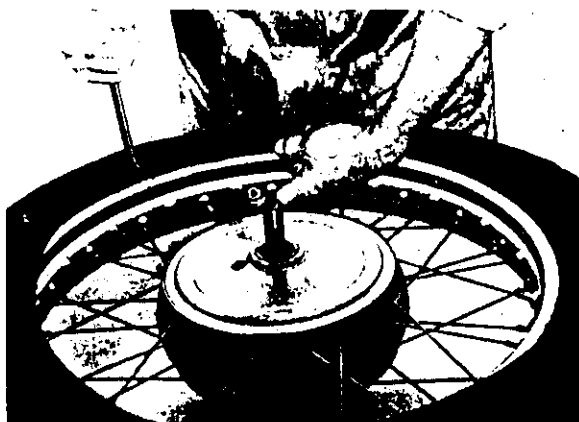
Refitting the second bead with the security bolt in position.
